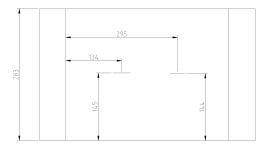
SAMPLE GEOMETRY AND FLAW LOCATIONS FOR 30 mm TARGET DEPTH CRACKS.
